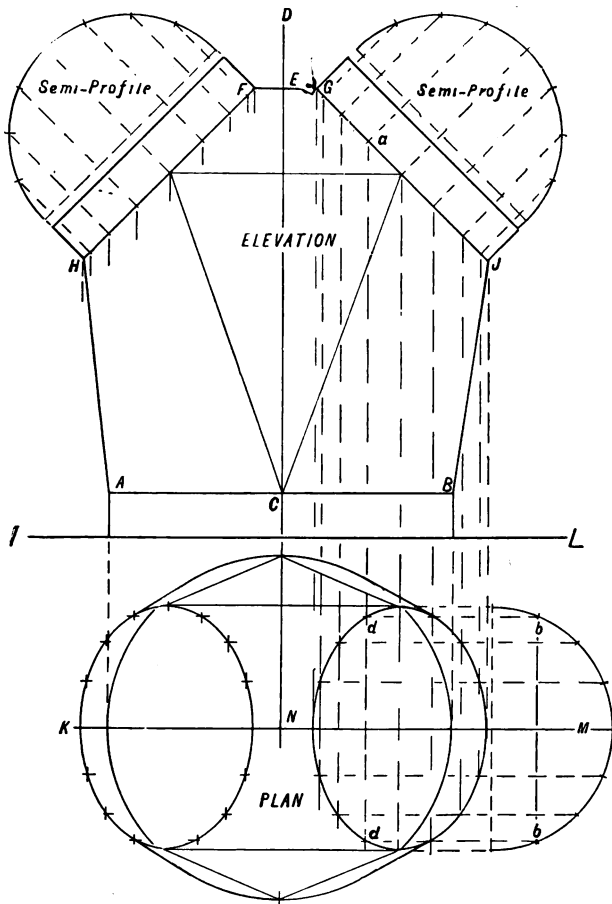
The Branched Fitting Represented in Plan and Elevation.
